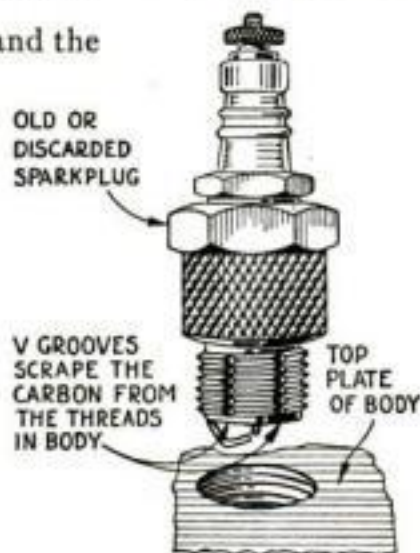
Using an old spark plug to remove carbon from threads of spark plug hole.
